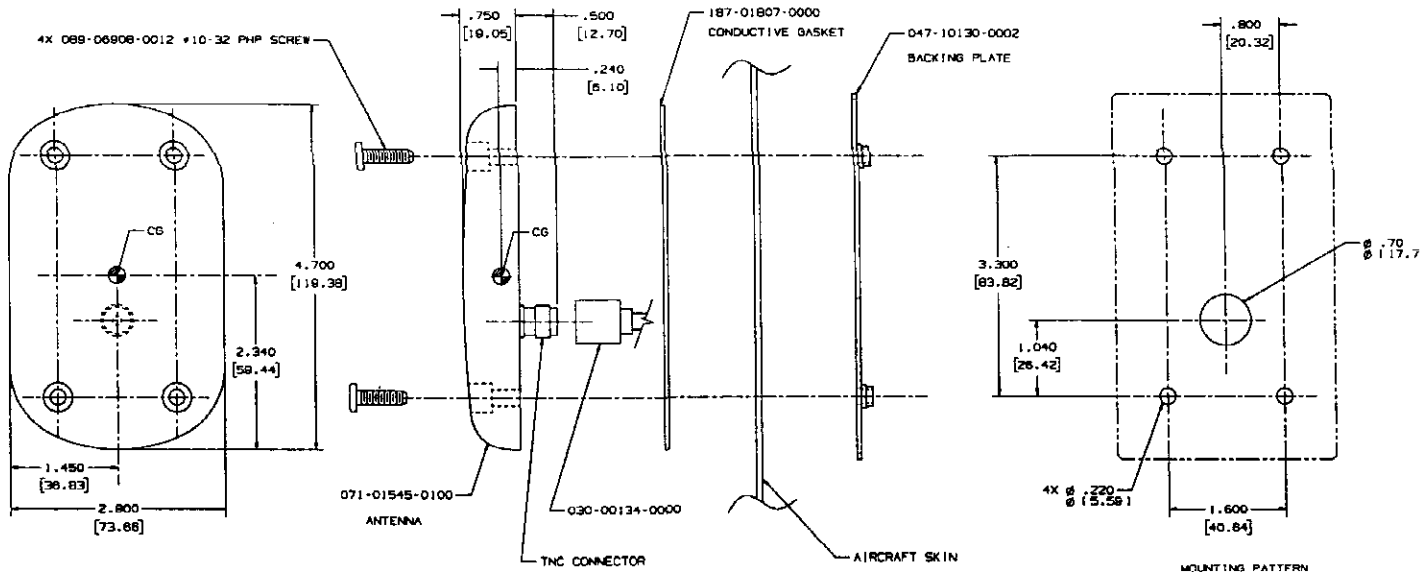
KLX 135 TRANSMITTER/RECEIVER OUTLINE AND MOUNTING DRAWING
